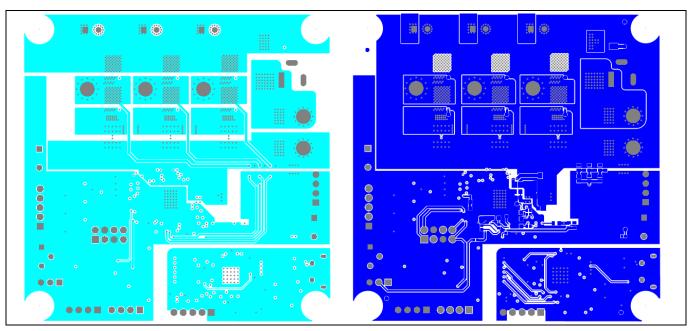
REF_IMD701A_720W_DC24 PCB internal layers 4 (left) bottom (right)
